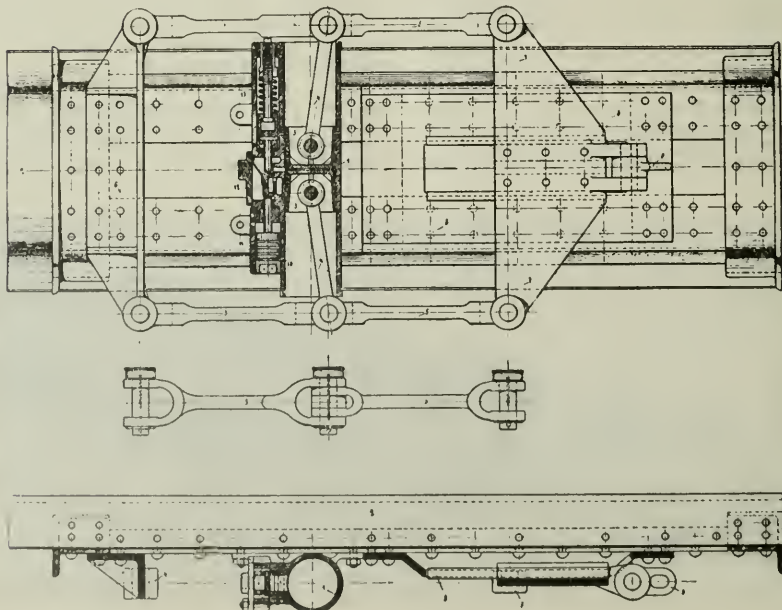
PART SECTION AND ELEVATION OF CHUTE.
